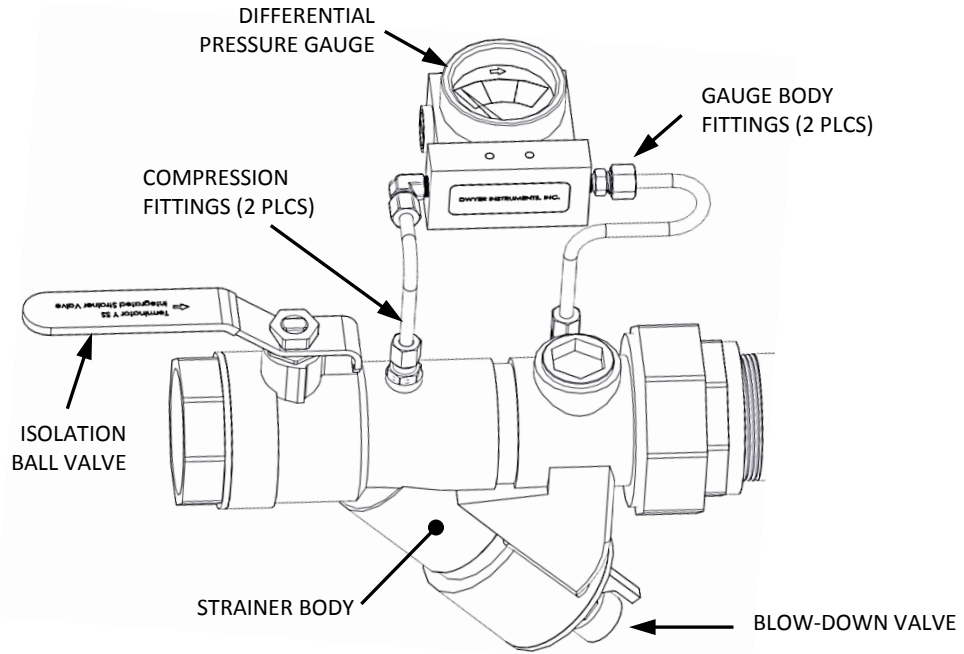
Differential Pressure Gauge/Strainer/Ball Valve Combo – Boiler Side
